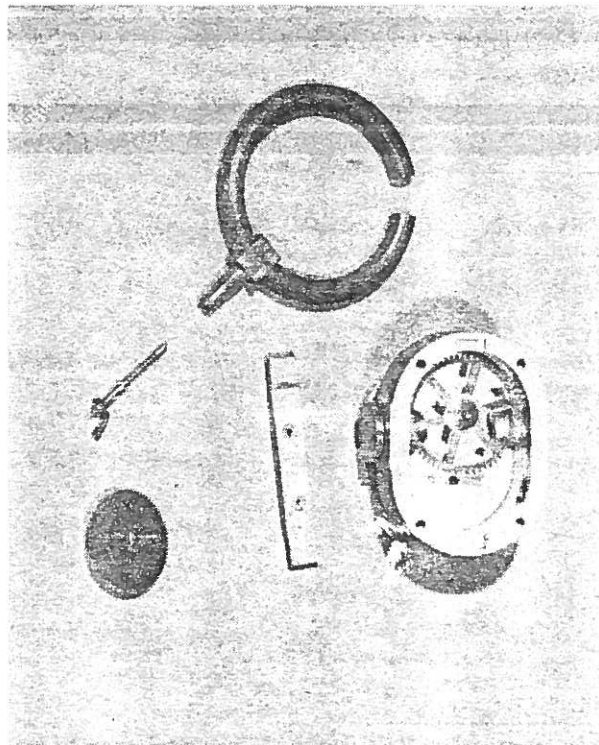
Gear case with parts removed. The stud to which the circular magnet is attached contains a jewel in which the upper pivot of the worm gear runs. The brass cap in the bottom of the case is also jeweled. The attachment at the bottom of the worm gear is a magnet and is propelled by the two horseshoe magnets carried on the pendulum rod.
